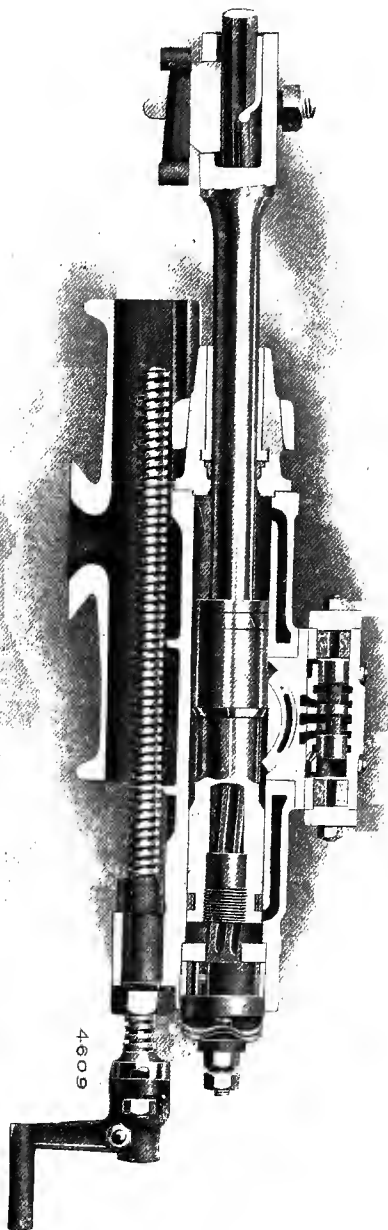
Sectional view of Sergeant rock drill, made by the Ingersoll-Rand Company.
